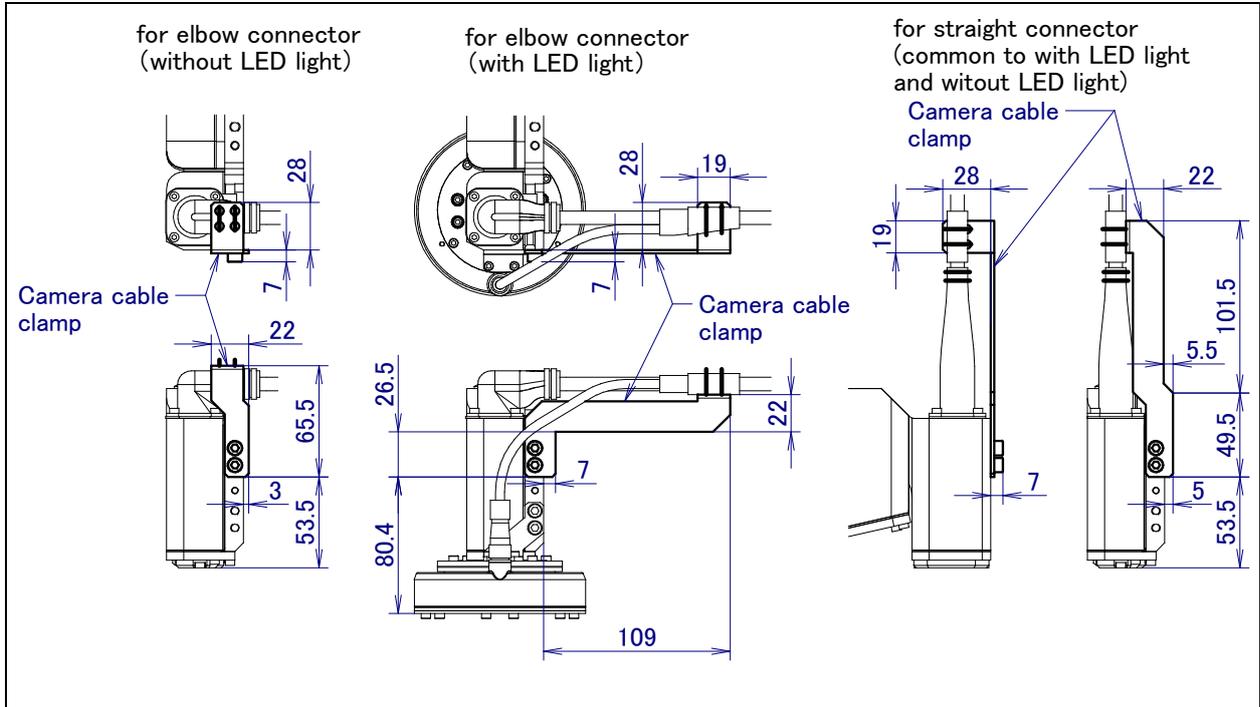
External dimension of camera cable clamp for 3D Laser Vision sensor
